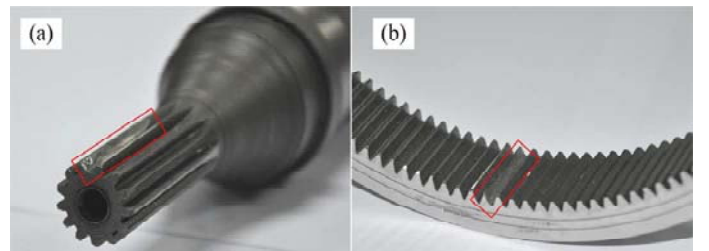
Pre-planted faults: (a) the sun gear and (b) the ring gear.
